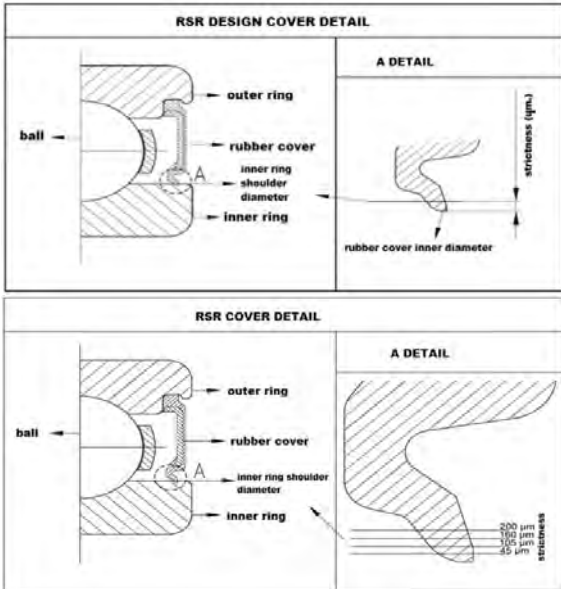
The strictness of seals and the values used in tests of Radial 6008 2RSR ball bearing
